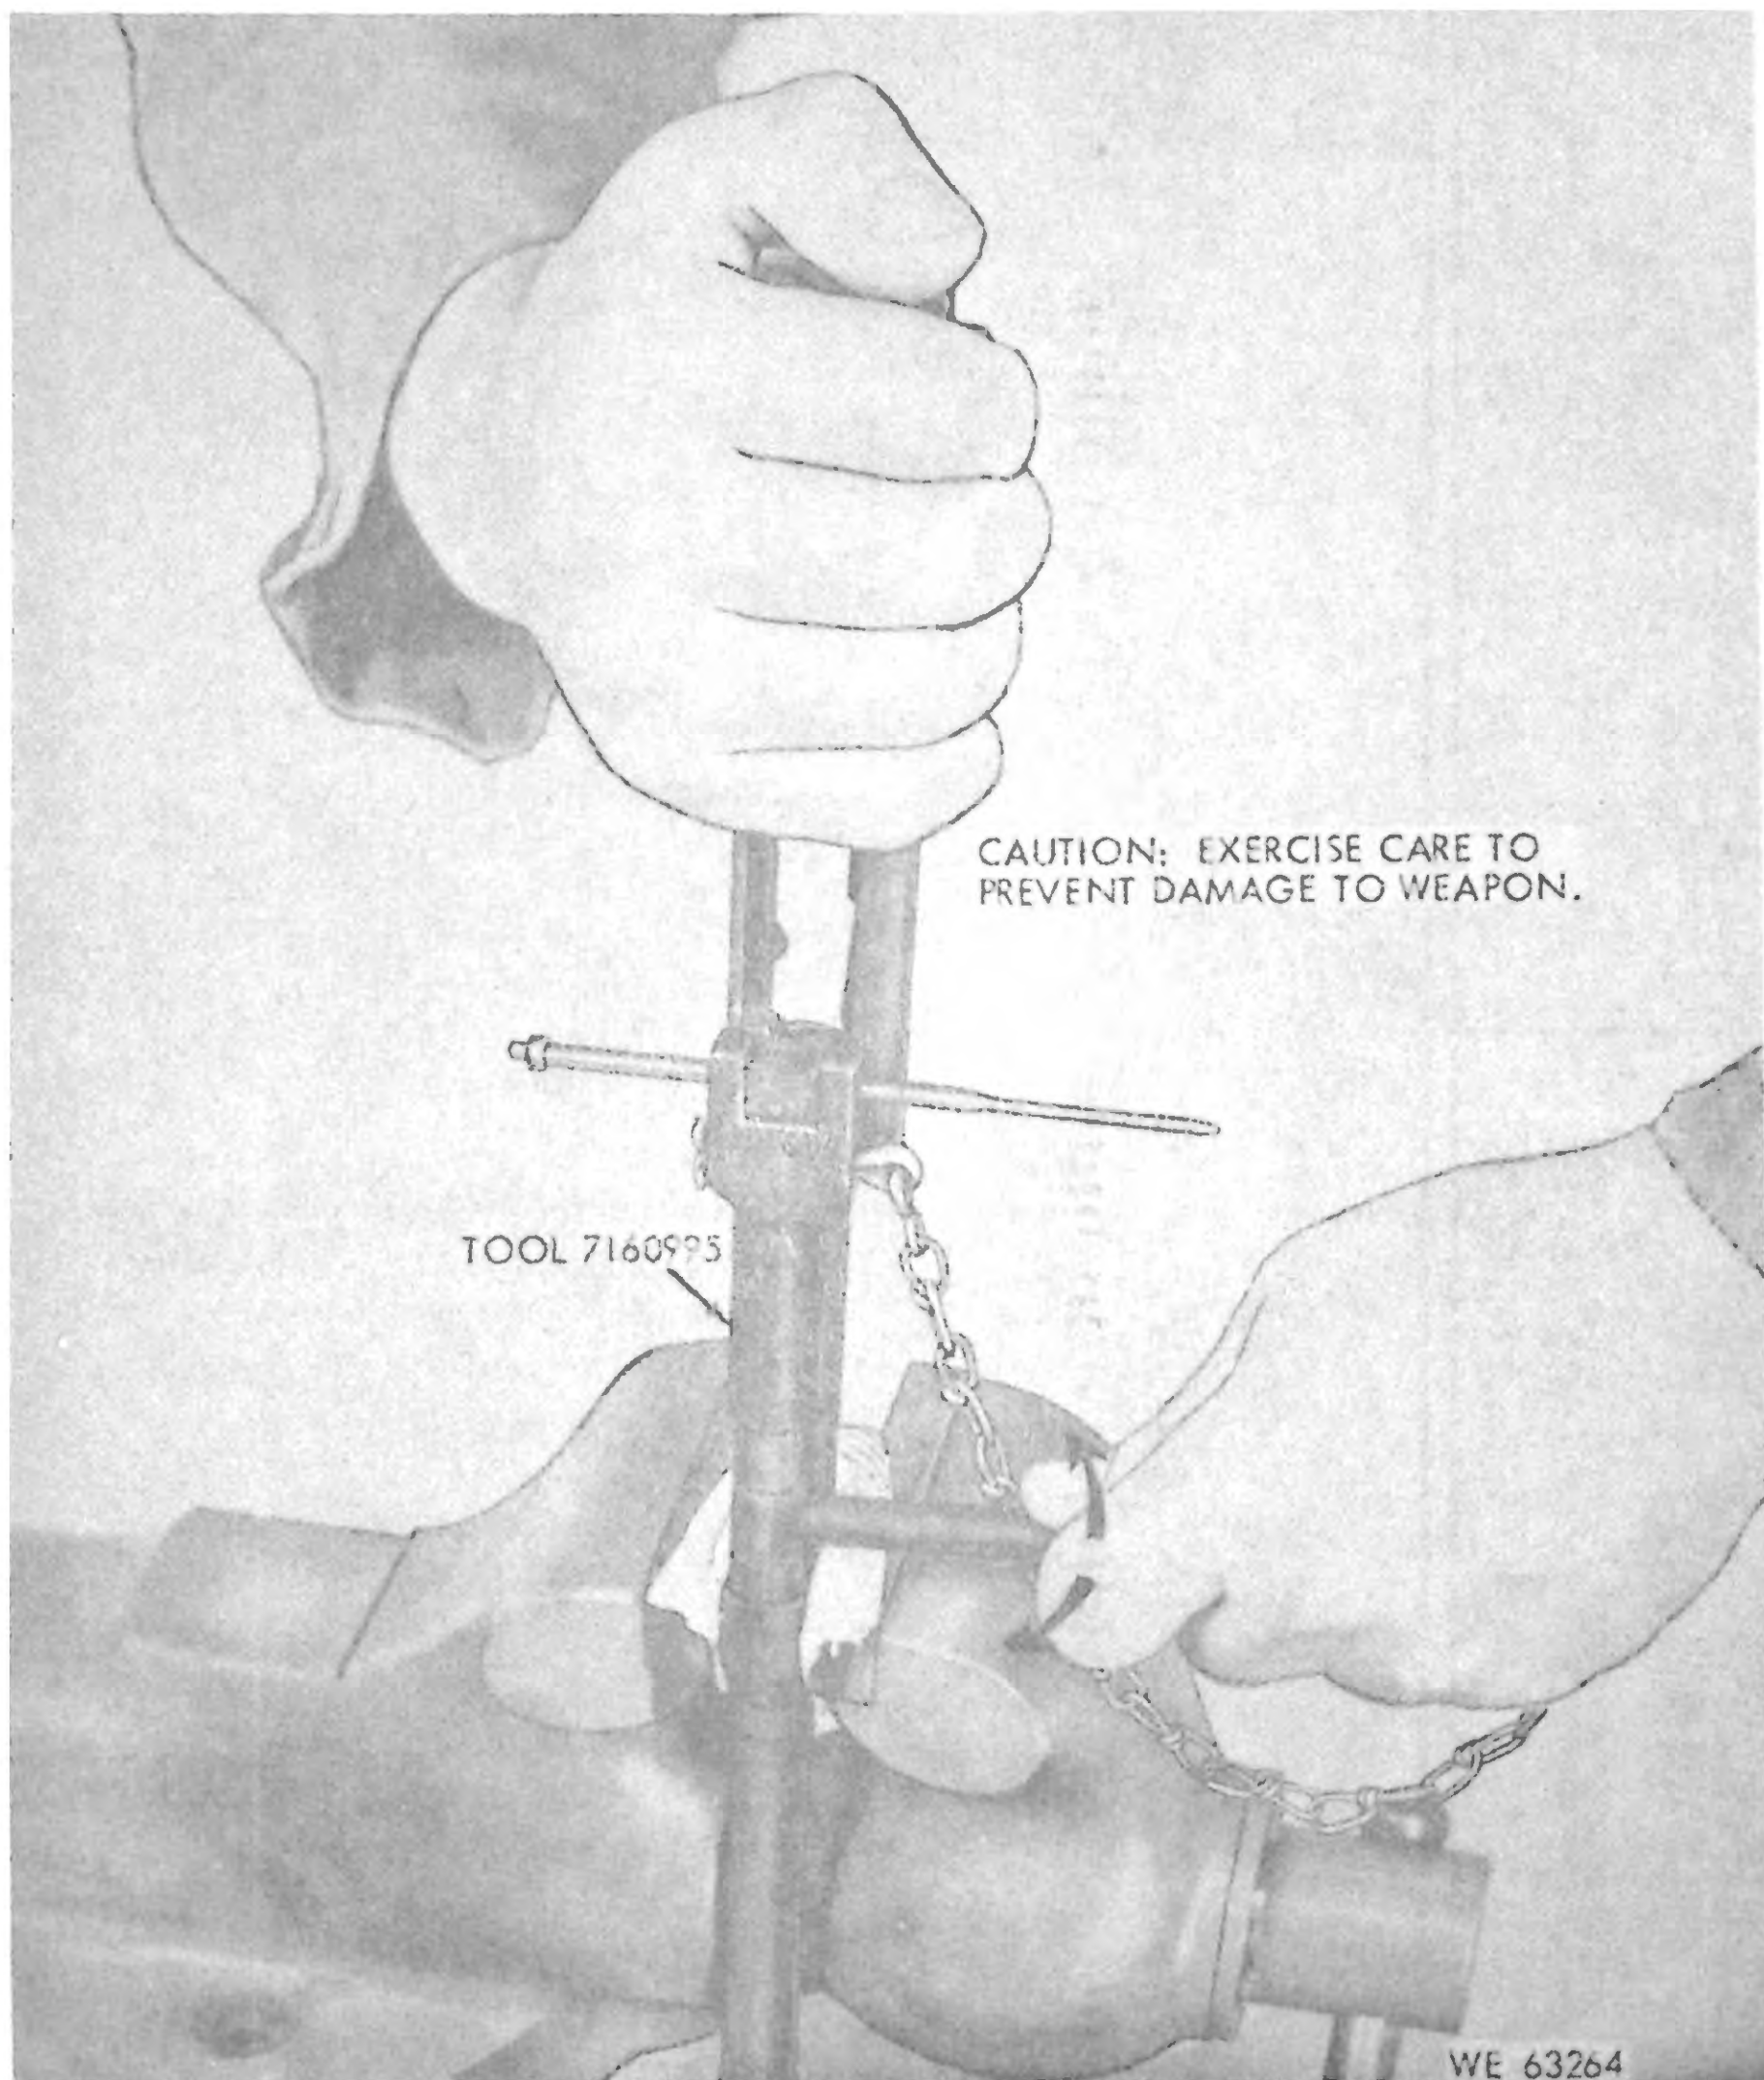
Chasing gas cylinder threads, using tool 7160995.
